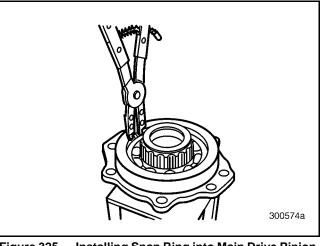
Installing Snap Ring into Main Drive Pinion Bearing Cover
